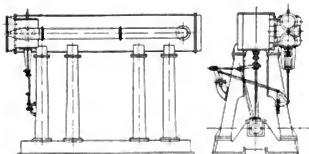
ARRANGEMENT OF PISTON TYPE CHANGE VALVES BETWEEN RECI-PROCATING ENGINE, TURBINE AND CONDENSER, IN COMBINATION SYSTEM WORKED FROM MAIN ENGINE.
